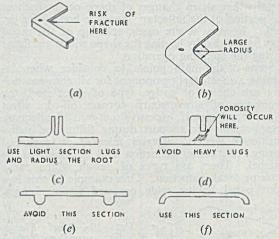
Points of a Casting liable to become Distorted or Fractured during Heating.
